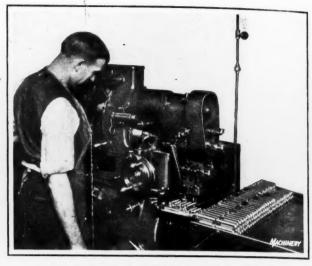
Grinding the Cross Hole in the End of a Valve Lifter
